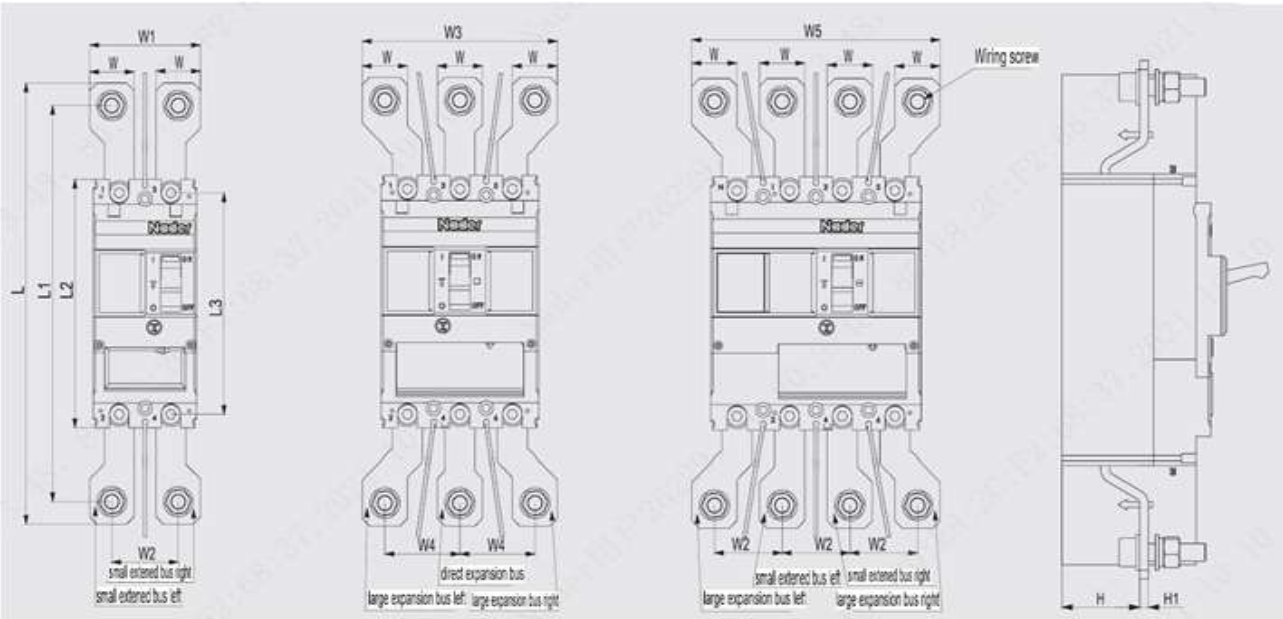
2P、3P、4P Outline and installation dimensions of expansion wiring in front of the board
